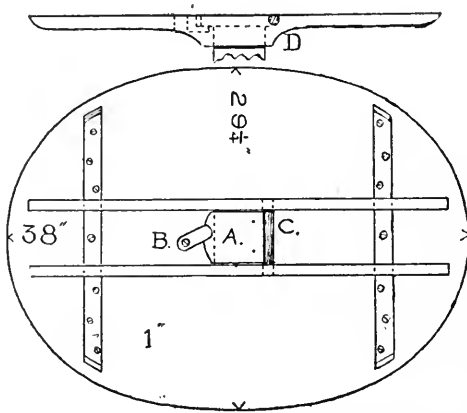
Under View of Table Top.—The Part D Represents Side View of Batter Showing Position of Dowel Hinge C and Catch B.
